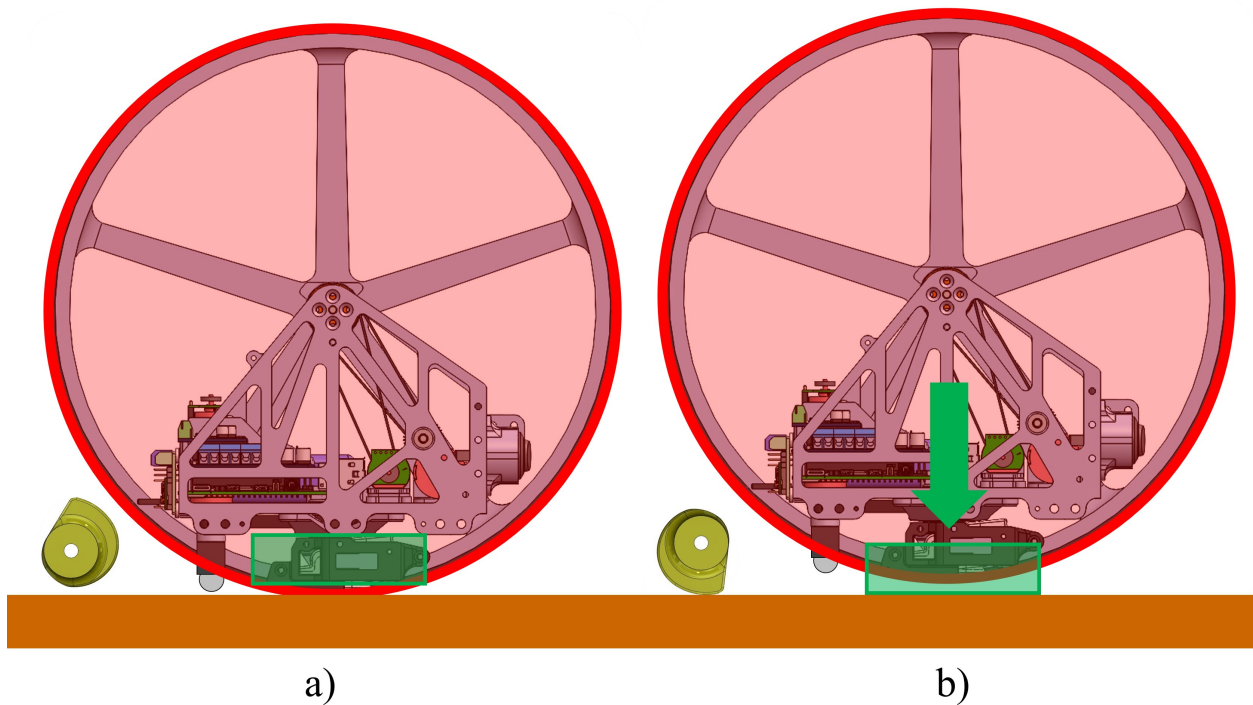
Side view of the wheels and belly gripper CAD. a) Initial view showing belly gripper's mounting position for full wheel coverage. The cam position is shown on the left (not to scale). b) When the cam is rotated, the belly gripper lifts the wheels above the surface, allowing EEWOC to rotate in yaw and steer without interference.
